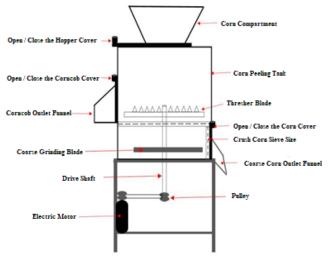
COMPONENTS OF THE CORN PEELING AND COARSE GRINDING MACHINE
